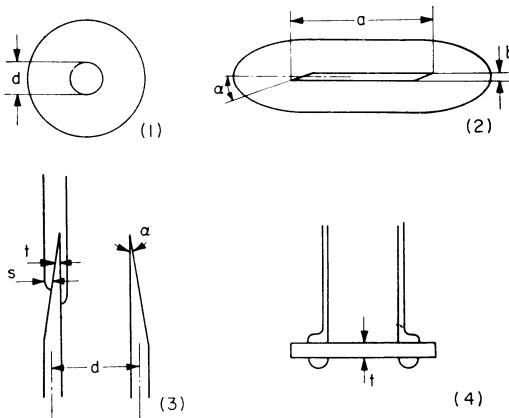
A Dimensions of Housekeeper seals (Table 2.35)
